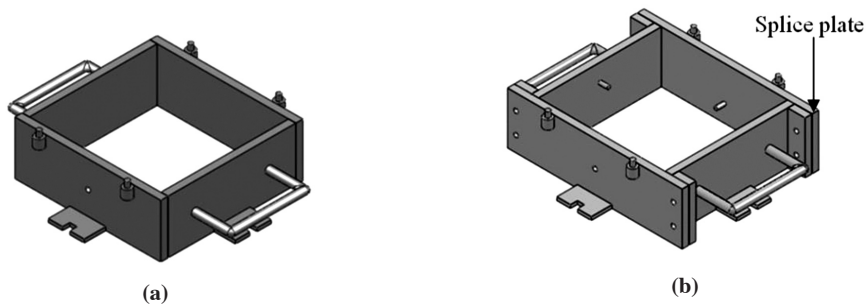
Steel frames: (a) conventional frame and (b) assembled frame
